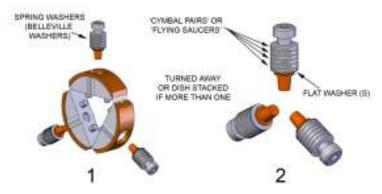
Some configuration of clutch spring stack. Each 'spring' stack contains multiple springs (Belleville washers) - arranged into three, four, or five 'flying saucers', or turned away against the flat washer(s). Shown is the $4\frac{1}{2}$ stack..
